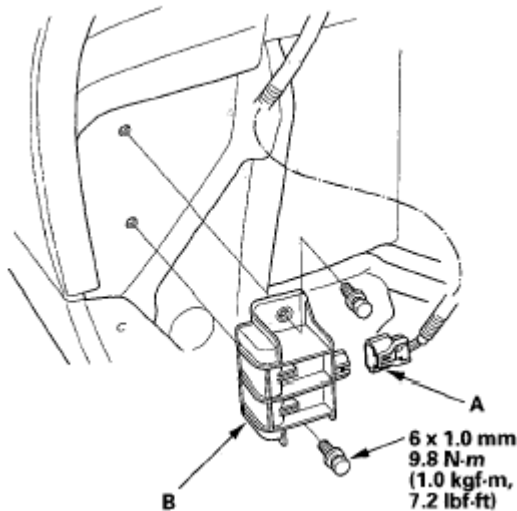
Identifying Initiator With Torque Specifications - Rear
